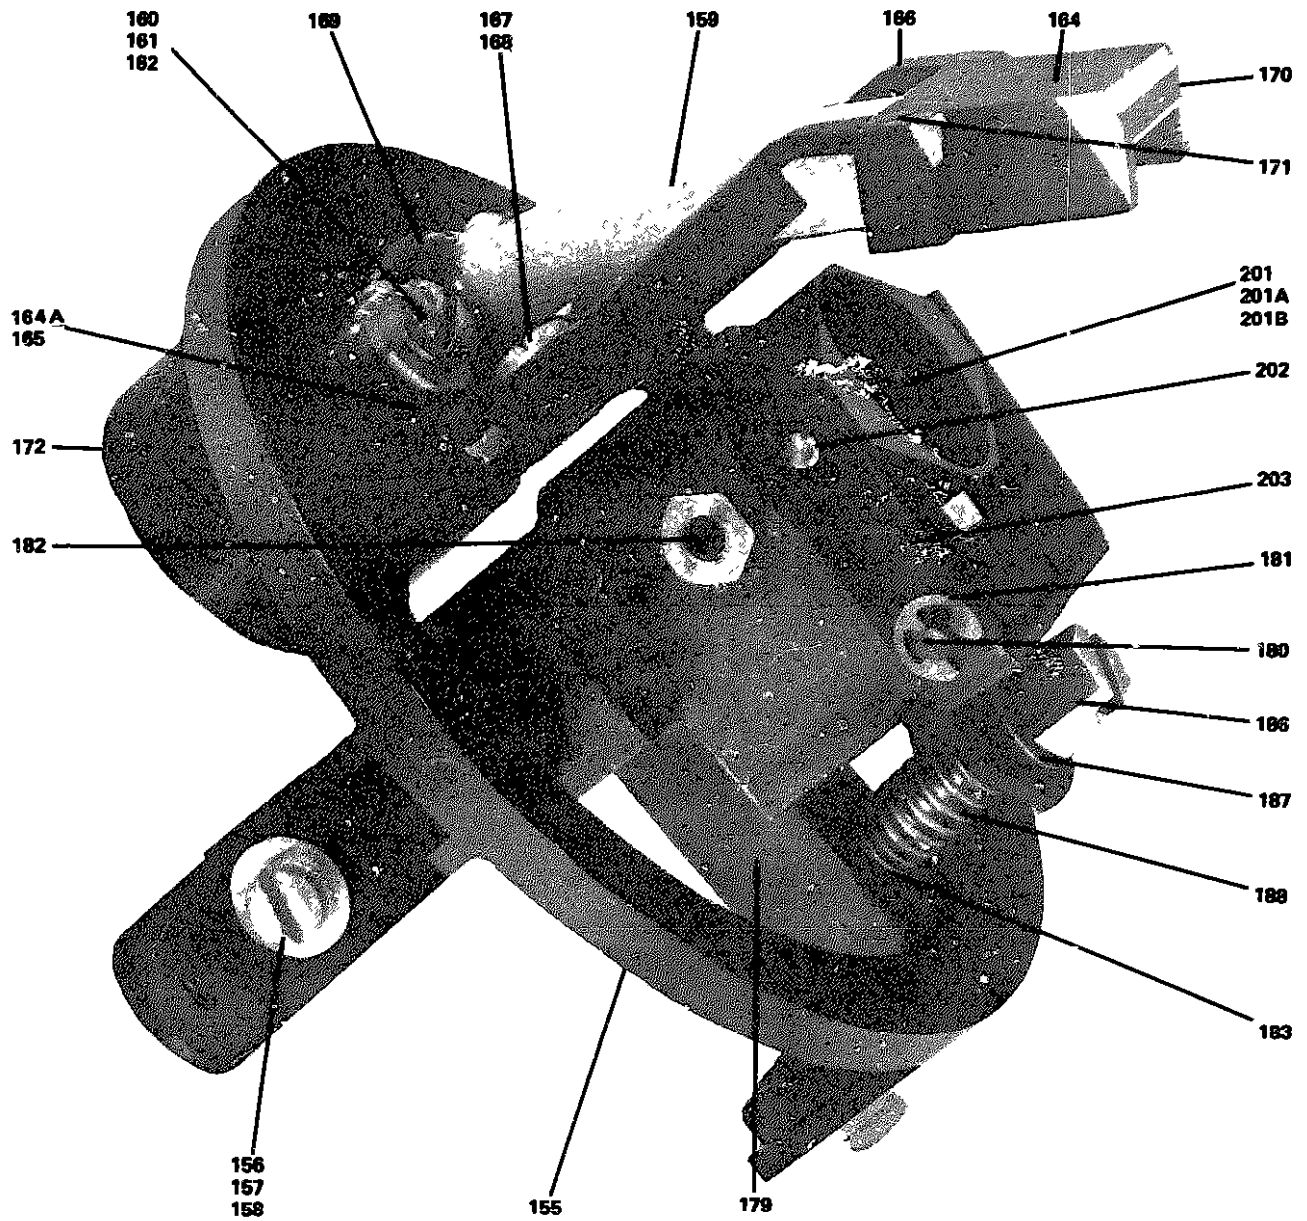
Read Head Optical Assembly Read Head Support 1A7A2A2 (Sheet 6 of 8)
